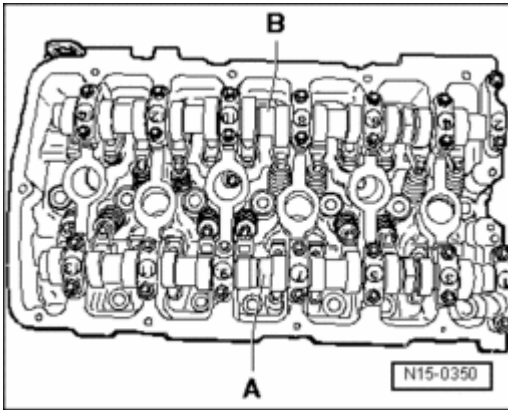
Identifying Intake Camshaft And Exhaust Camshaft
